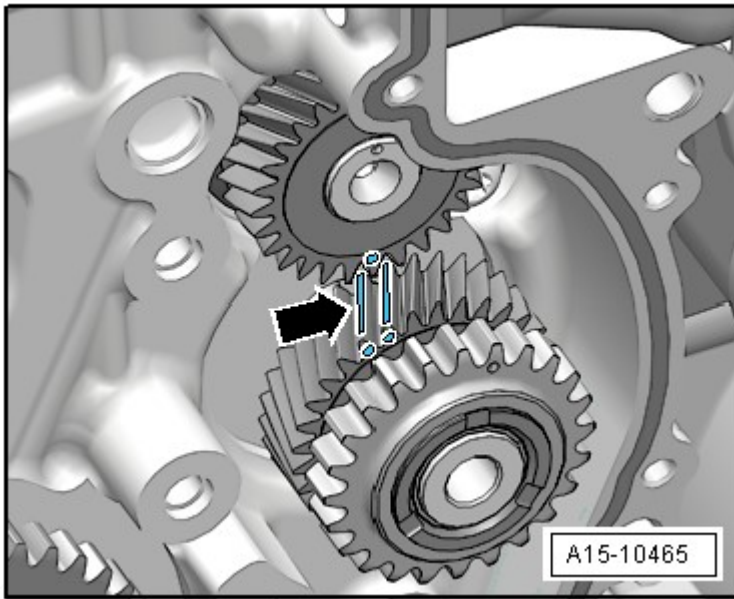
Identifying Tooth Face On Intermediate Shaft Sprocket Marked With Paint
